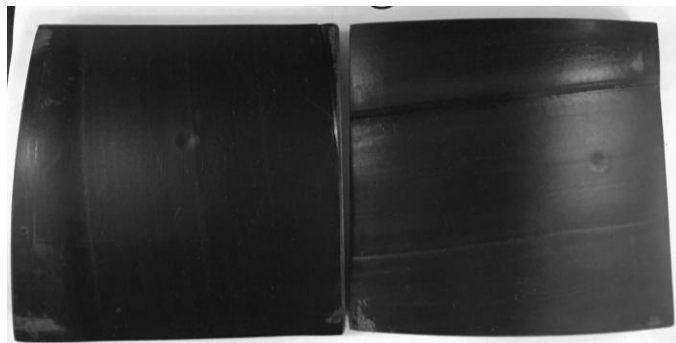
Impact testing at -20°C in two-layer extruded system. No failure after holiday detector inspection
